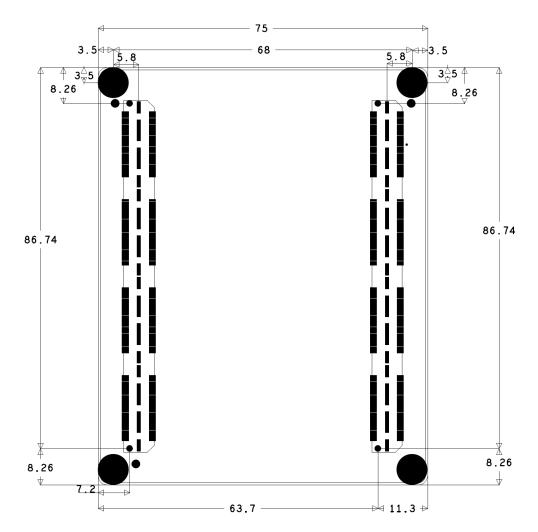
Mechanical dimension of Arria10 SoC/FPGA SOM- Top View
